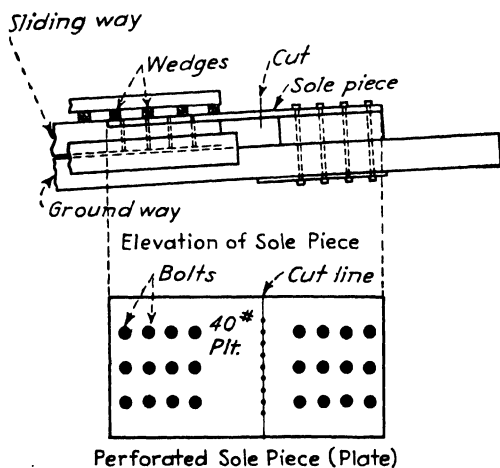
B.—Ship releasing arrangement making use of a sole piece.
